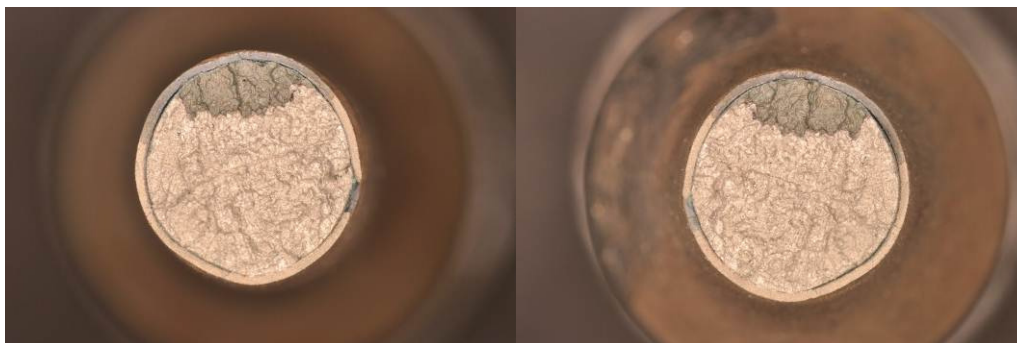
Aspect of fracture surfaces on the two parts of broken specimen R262-1
